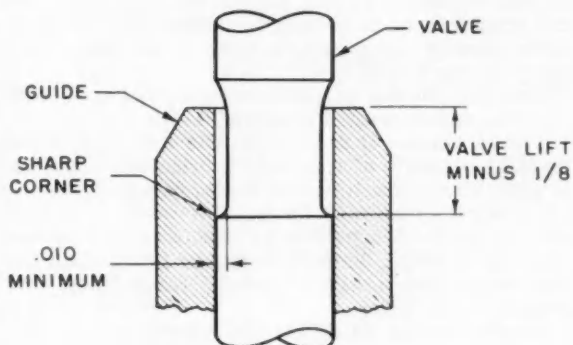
Use of a carbon scraper is one way to combat valve guttering
